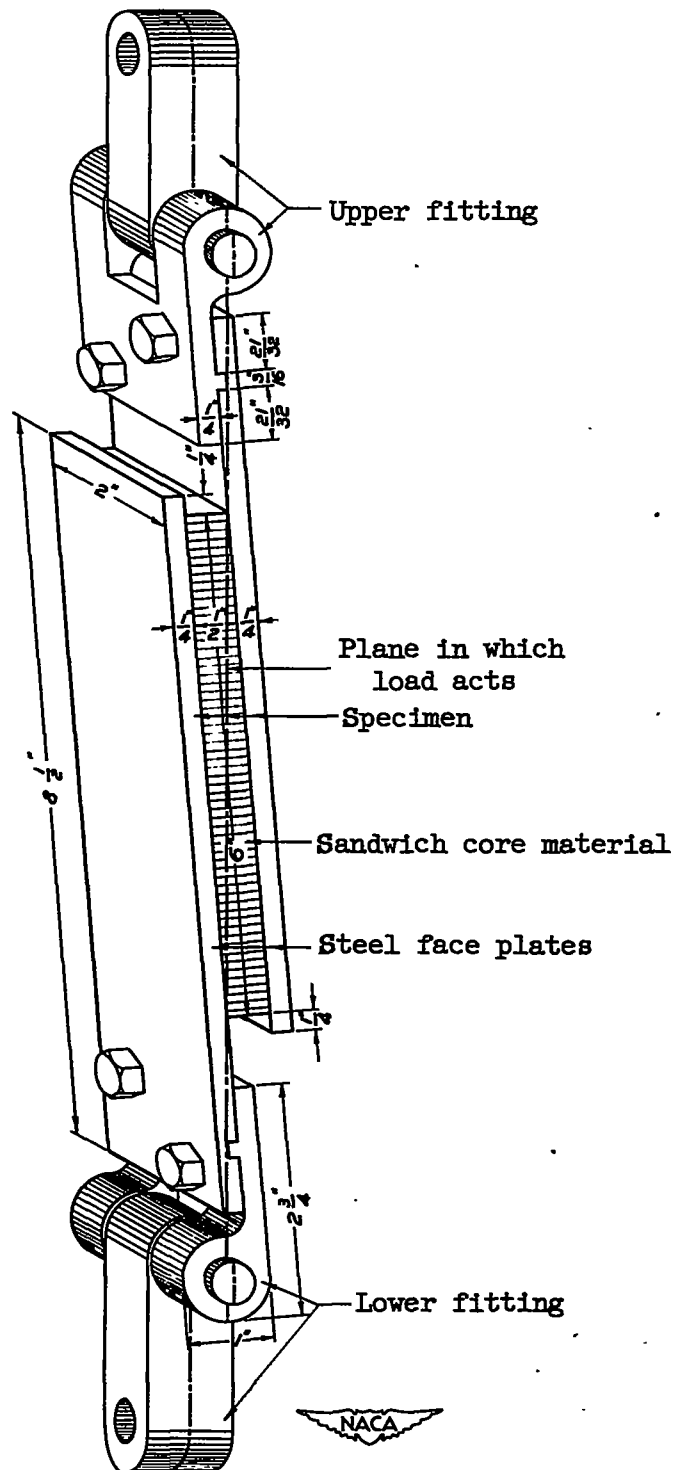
Detail of tension-frame shear specimen used for shear tests of sandwich core material.
